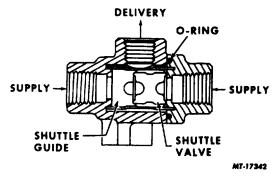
Sectional View of Double check Valve Shuttle Type.
